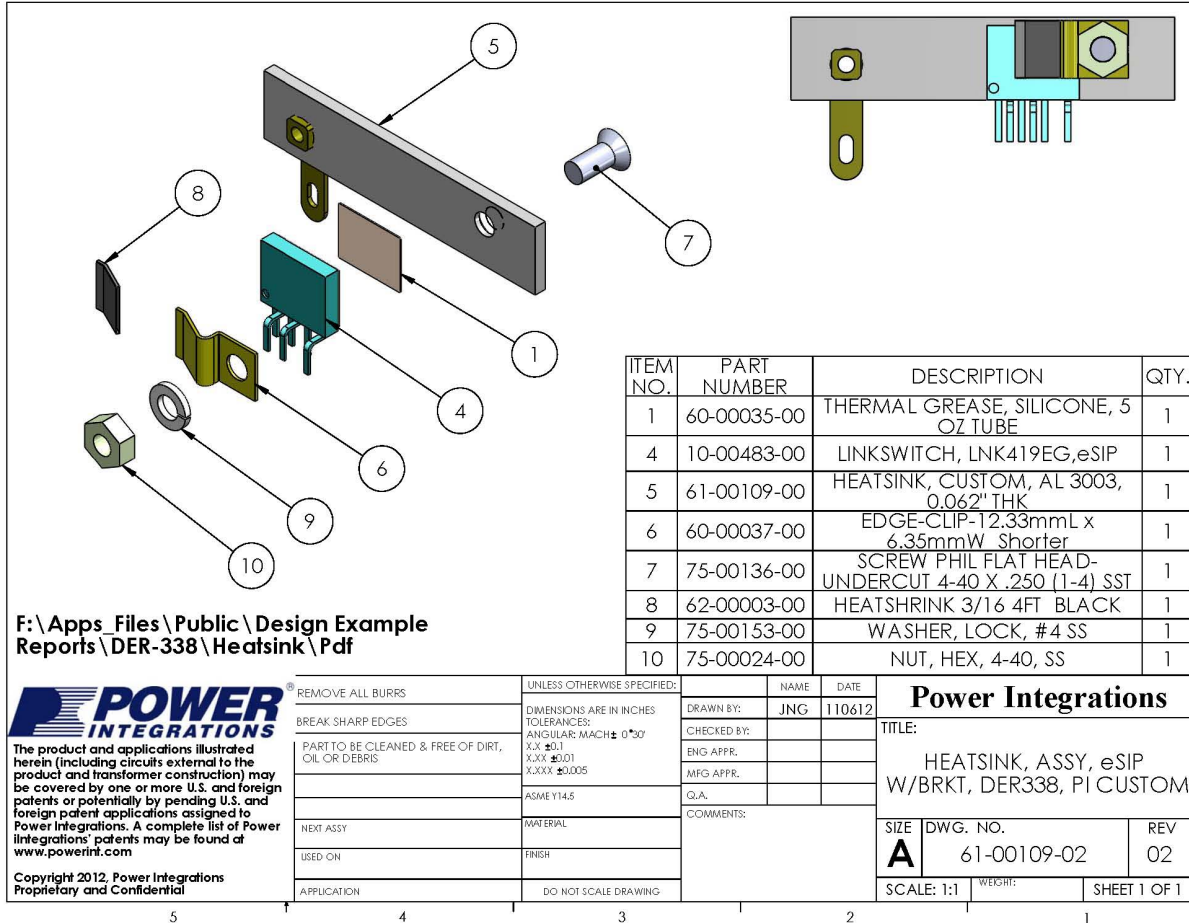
Heat Sink and LYTSwitch Assembly Drawing.
